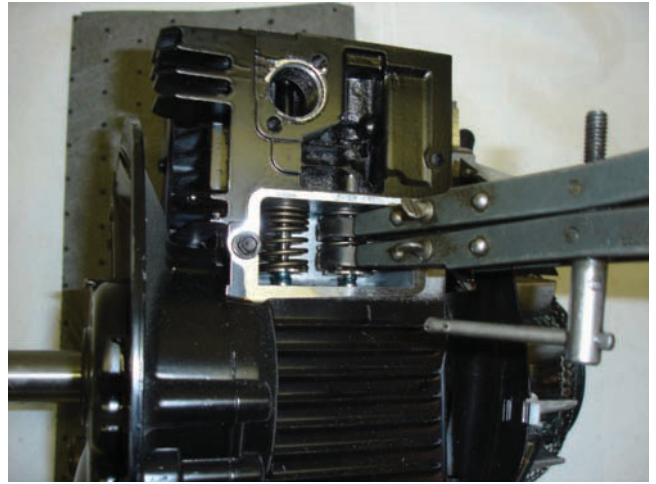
Many valve springs are removable without special tools, but some require the use of a valve spring compressor to compress the valve spring to enable valve removal.
